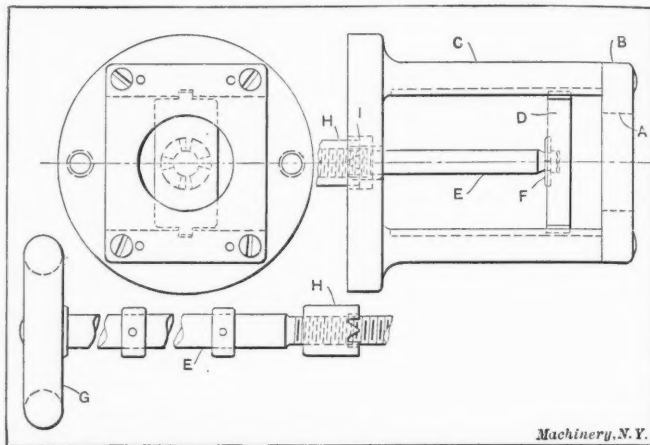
Jig for Holding Pieces shown in Fig. 2, for Threading
